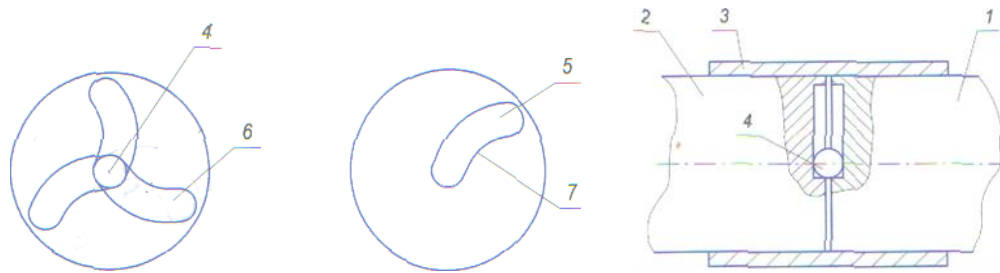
Ball overrunning clutch with multiple grooves: 1 and 2 - shaft ends; 3 - sleeve; 4 - ball; 5 and 6 - grooves on the shaft ends.
